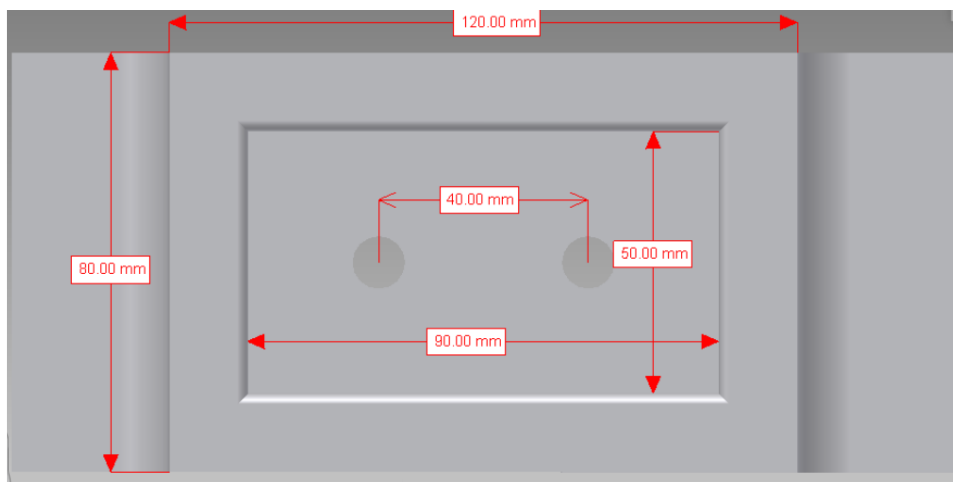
Top view of the bottom mould 2 with dimensions included (rendered on *Autodesk Inventor*)
